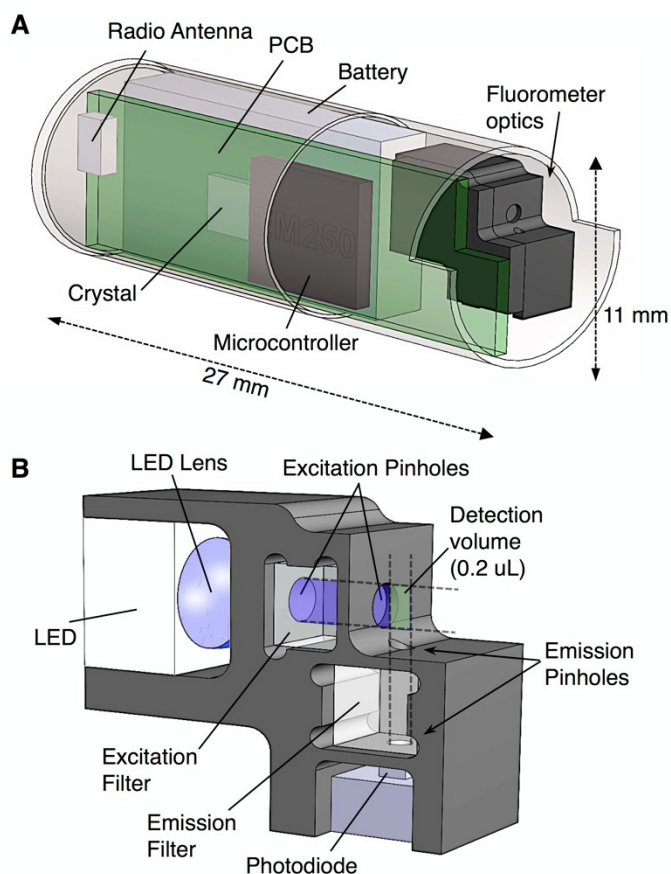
Schematic of the components and housing of capsular device (A) the fluorometer components and optical paths (B).
